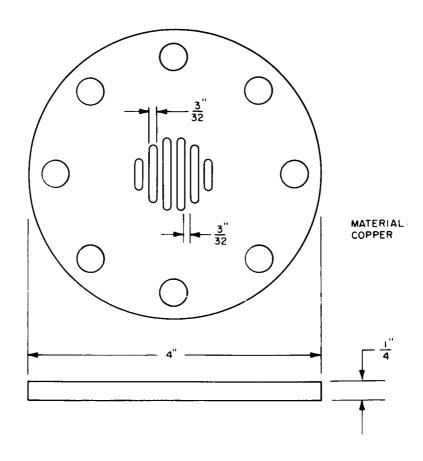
Control Grid Design for Type Z-7009, Tube No. 22
